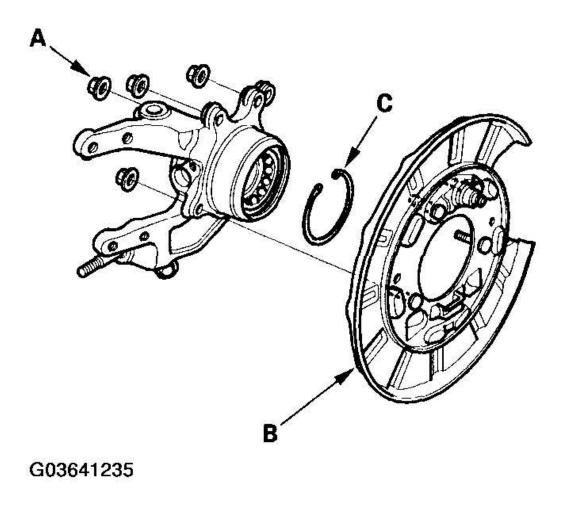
Removing Flange Nuts, Backing Plate And Snap Ring Courtesy of AMERICAN HONDA MOTOR CO., INC.
